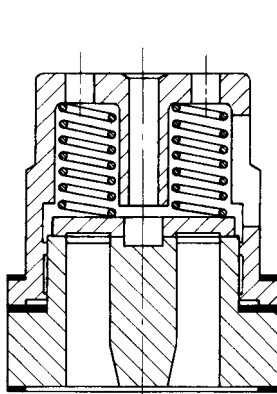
Reciprocating pump double-ported disk valve.
